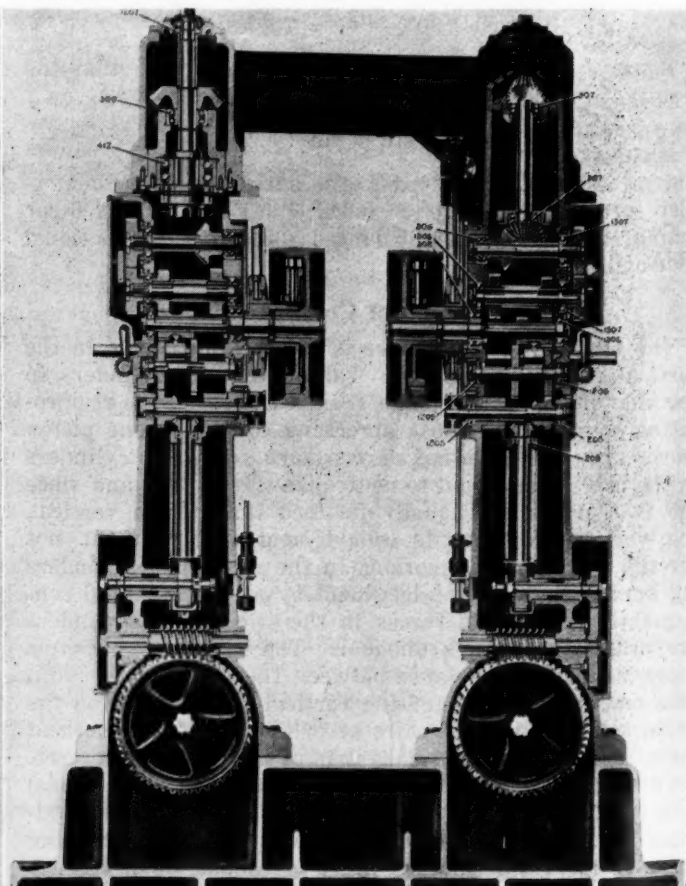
Longitudinal section. Note extensive use of ball bearings and spline shafts
